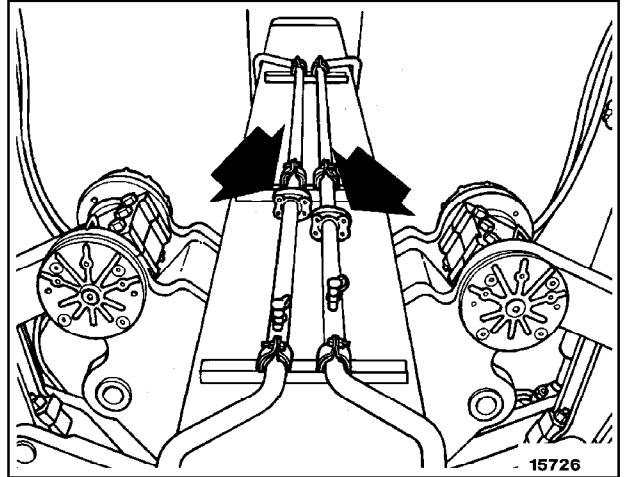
SPLIT FLANGE CONNECTIONS ON HIGH PRESSURE TUBES LEADING TO H.I.C. VALVE
